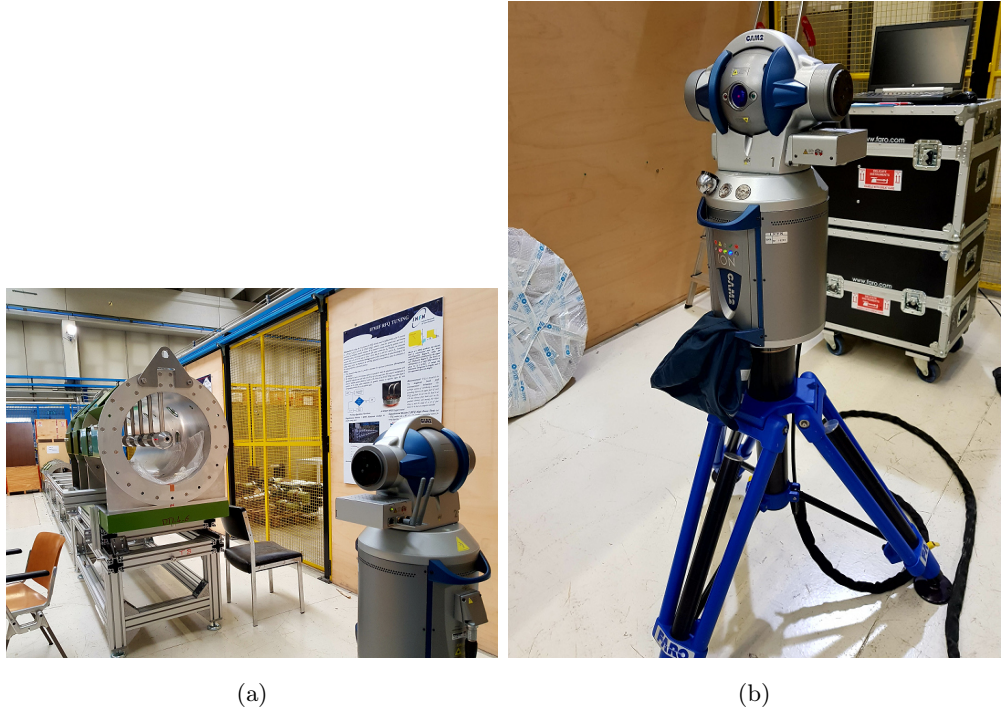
DTL tank 2 assembly steps: (a) drift tubes and modules alignment; (b) the used laser tracker with its control laptop.
